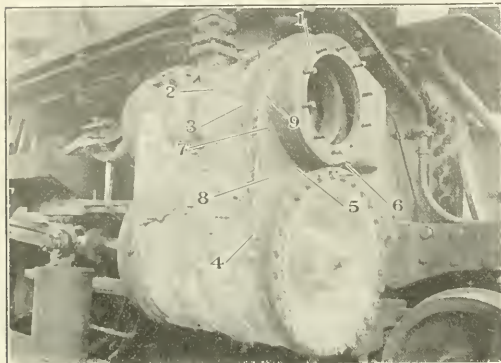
A Badly Broken Casting Which Taxed the Ingenuity of the Welder
